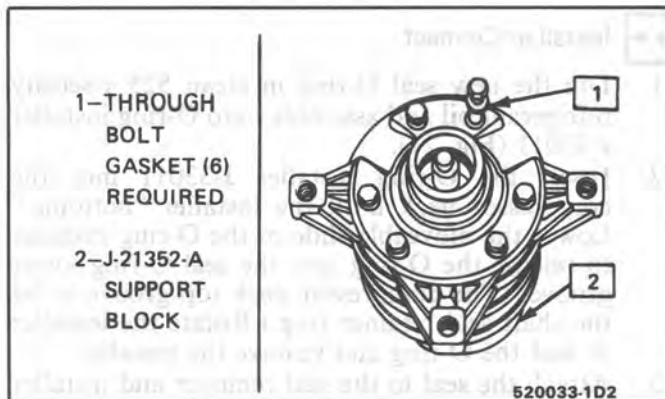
Front Head Installed: Thru Bolts and Gaskets In Place
